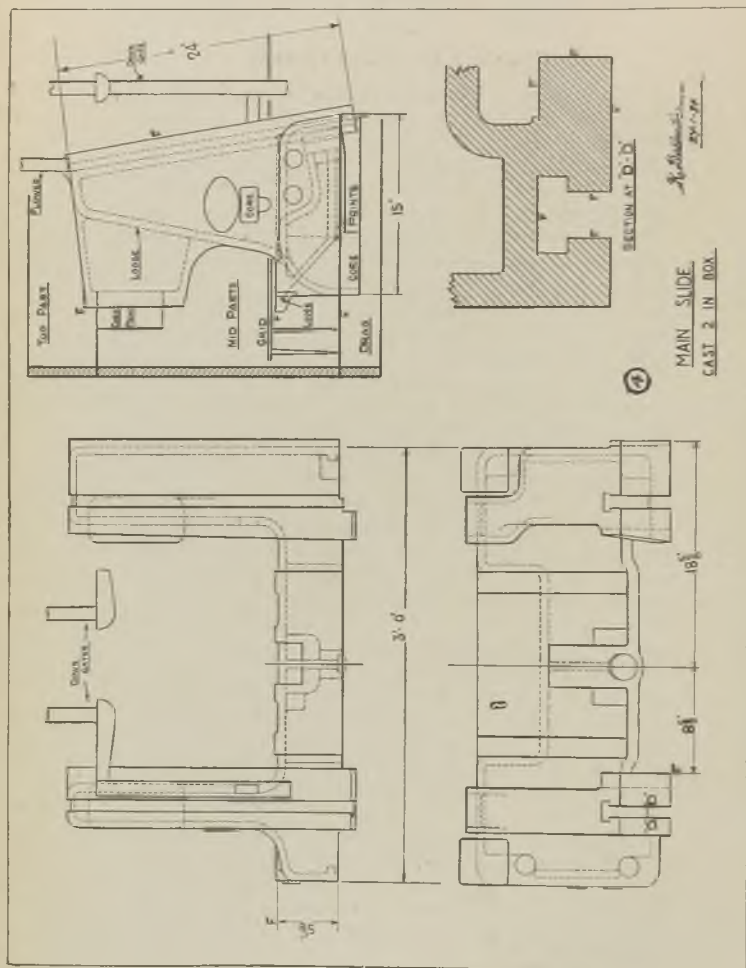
MOULDING DETAILS OF A MAIN SLIDE CAST TWO IN A BOX.
